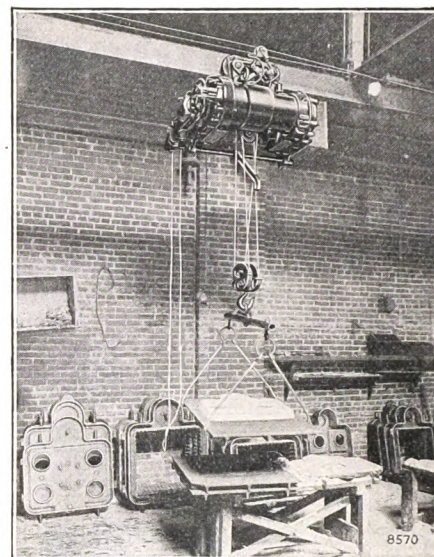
ELECTRIC HOIST HANDLING CORES IN A FOUNDRY
